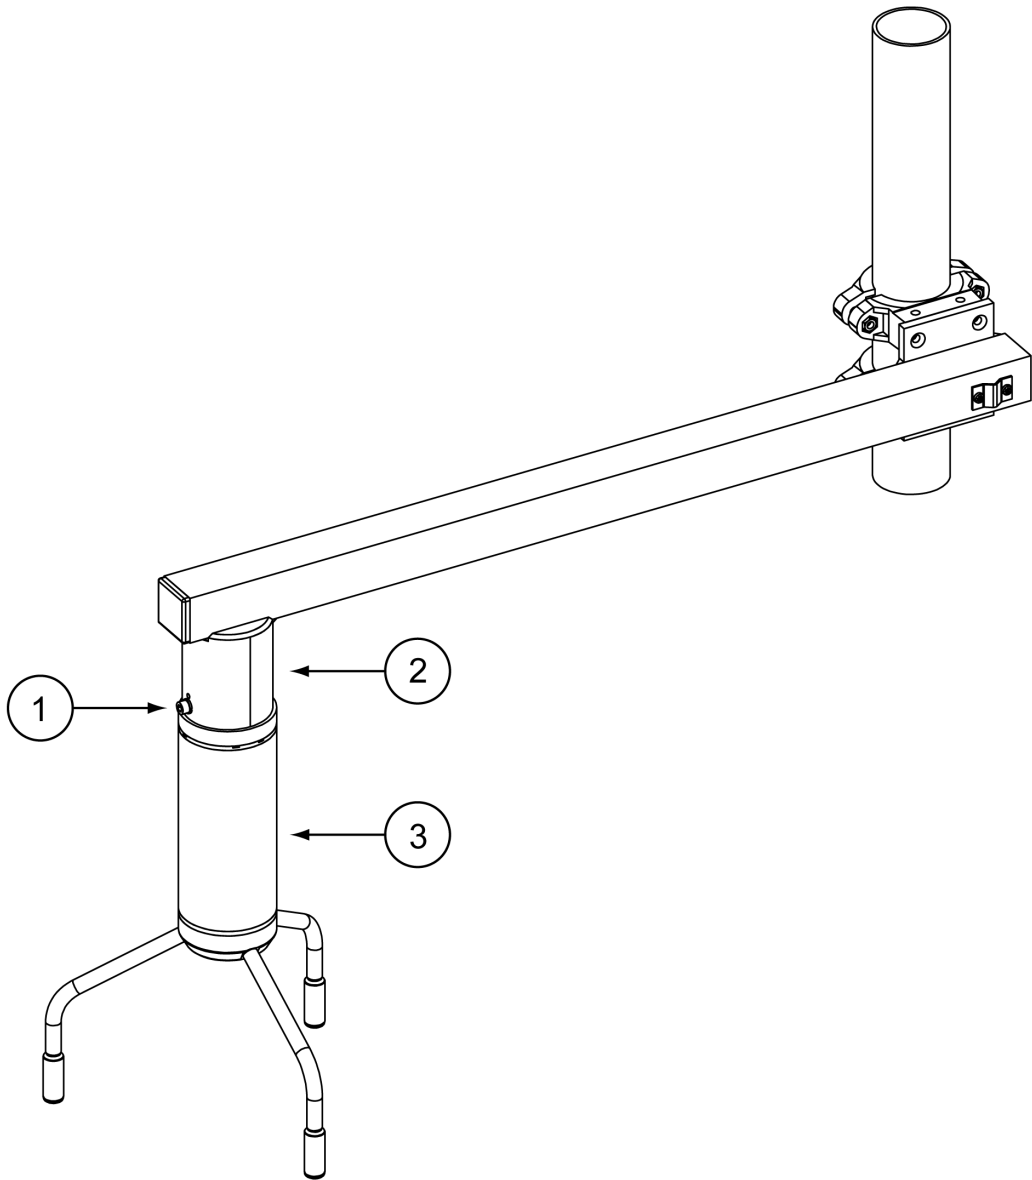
Retrofit Installation to Cross Arm with Array Facing Down
